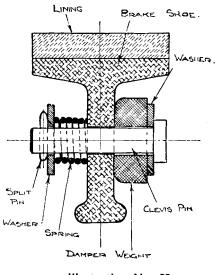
Illustration No. 22. —Sectional view through a brake-shoe, showing the lead weight attached to the brake-shoe, and the various component parts for same.
